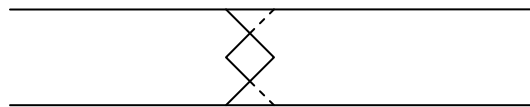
V SHAPE (KNIFE TYPE) BLADES ACCESSORIES THAT FORM SQUARE WIRE STRIP CAVITIES (UNACCEPTABLE)
